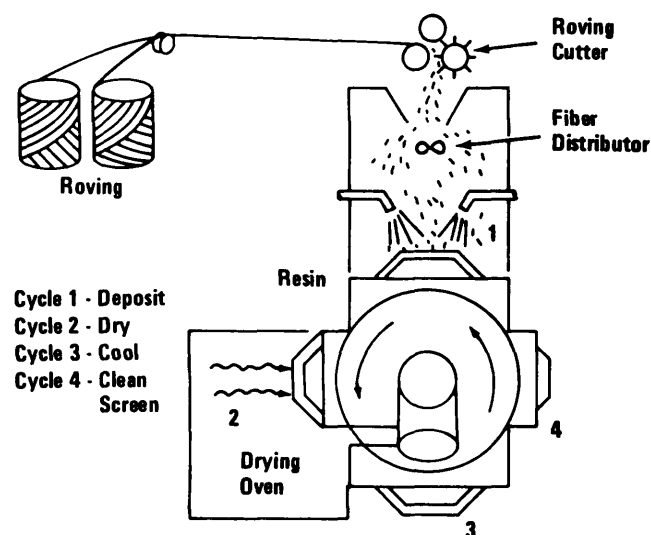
Plenum Chamber Preform Machine (Ref. 1)
